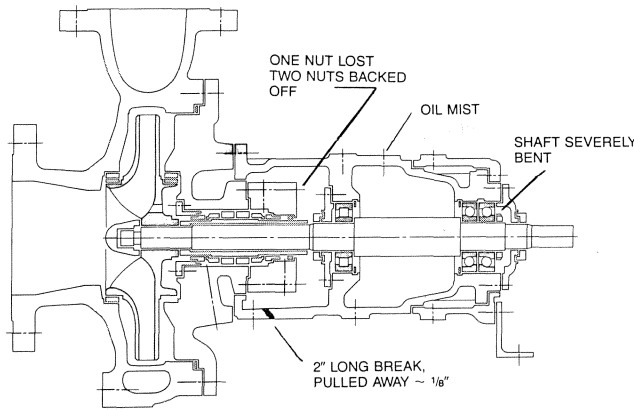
Schematic Cross-Sectional View of Centrifugal Pump.
